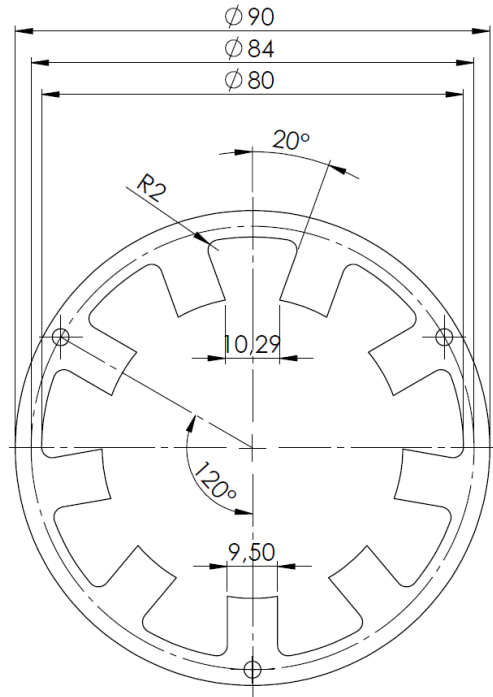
Stator and rotor geometry of the in-wheel motor (Source: Vernis Motors SL.).
